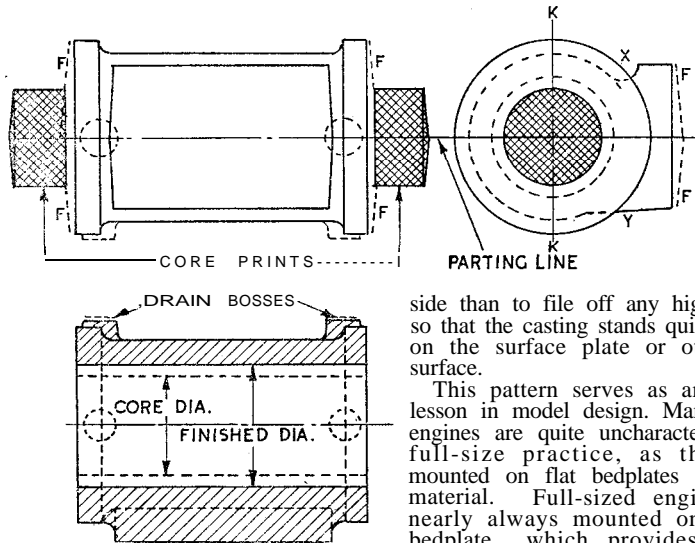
Pattern for cylinder of a steam engine, with prints for a plain core. The finished casting is shown in section
